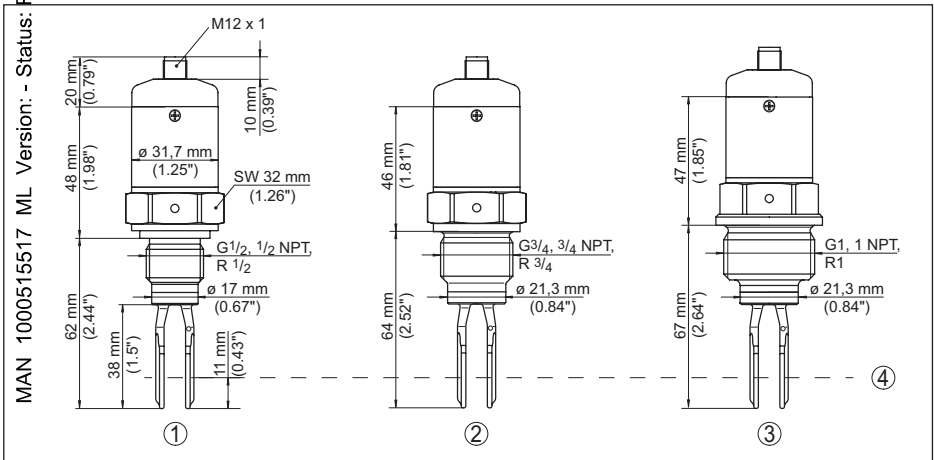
LEVEL SWITCH 8110, standard version - threaded fittings
